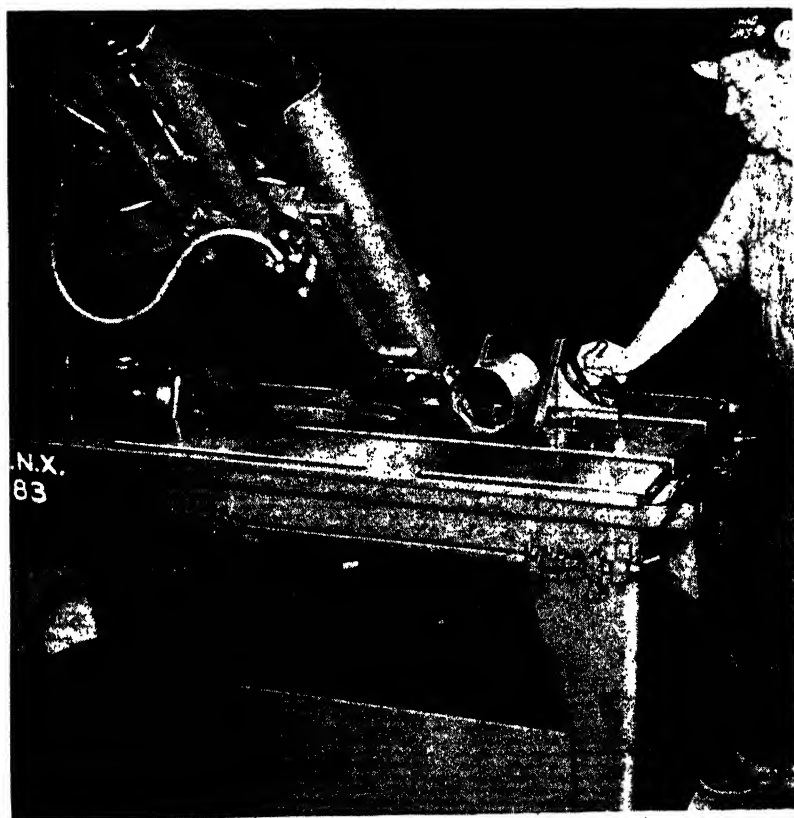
Using a Sawing Machine of Band-saw Design for Cutting a Piece of Steel Pipe at an Angle
